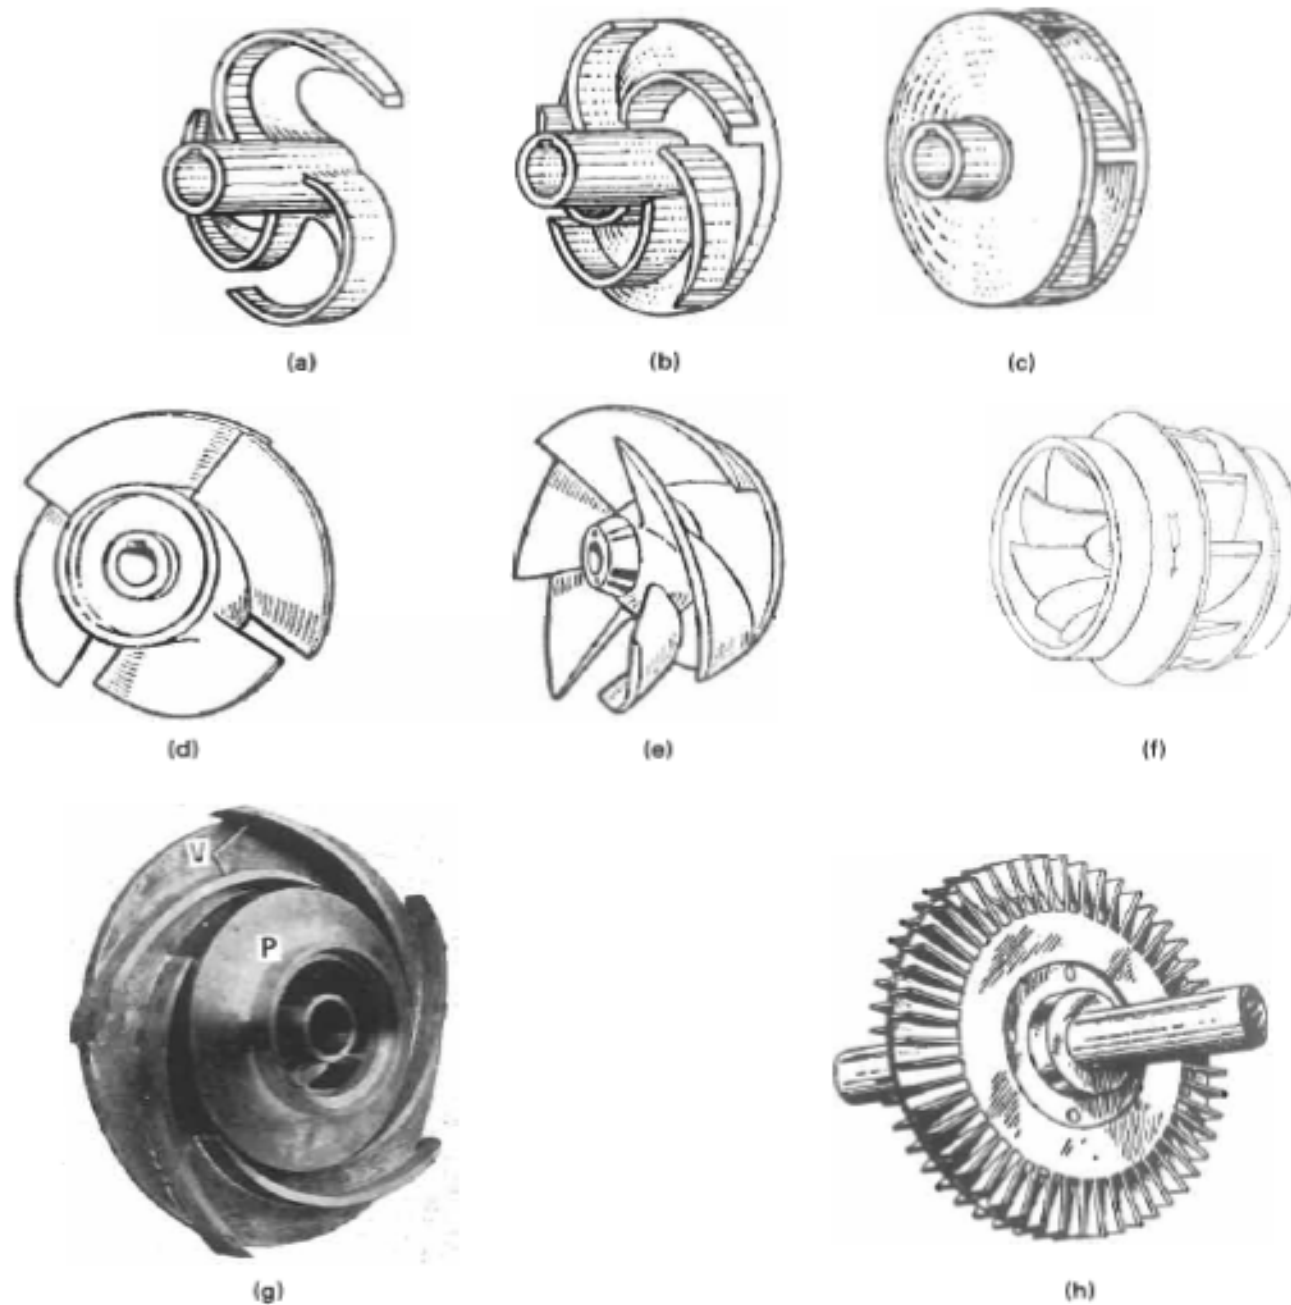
Some types of impellers for centrifugal pumps. (a) Open impeller. (b) Semiopen impeller. (c) Shrouded impeller. (d) Axial flow (propeller) type. (e) Combined axial and radial flow, open type. (f) Shrouded mixed-flow impeller. (g) Shrouded impeller (P) in a case with diffuser vanes (V). (h) Turbine impeller.
